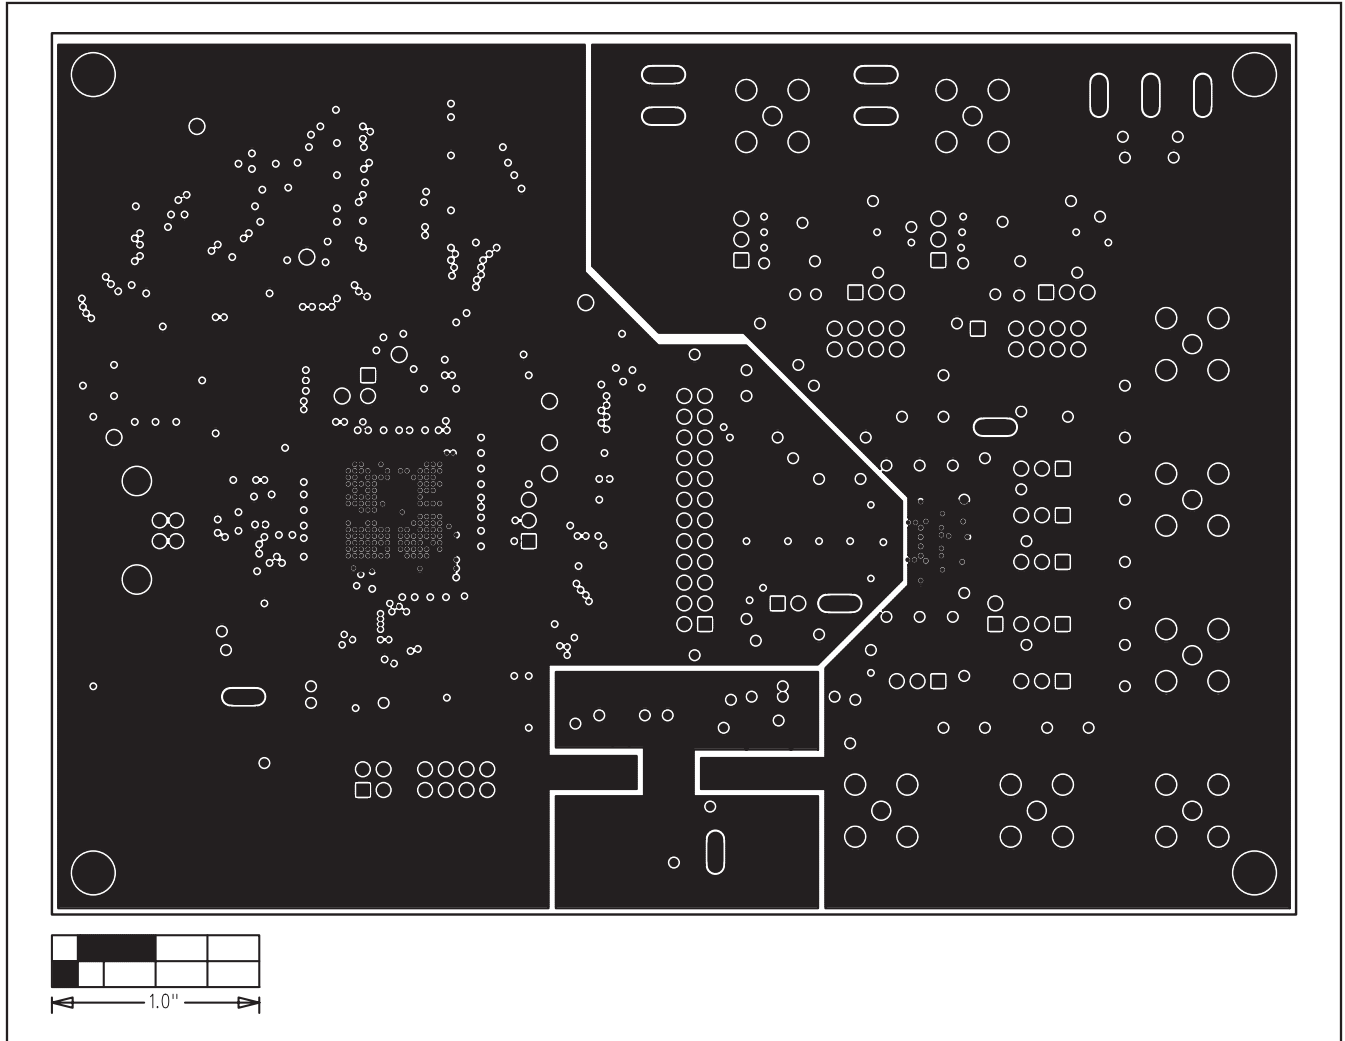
MAX11046 EV Kit PCB Layout—Inner Layer 4 (Ground)
